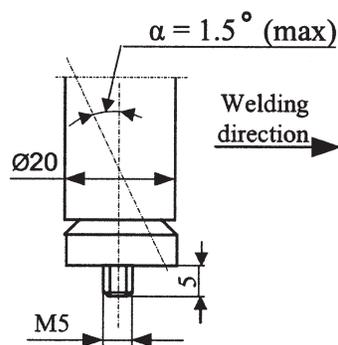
Rotating tool details used in experiments (dimensions in mm, tool material: stainless steel).
